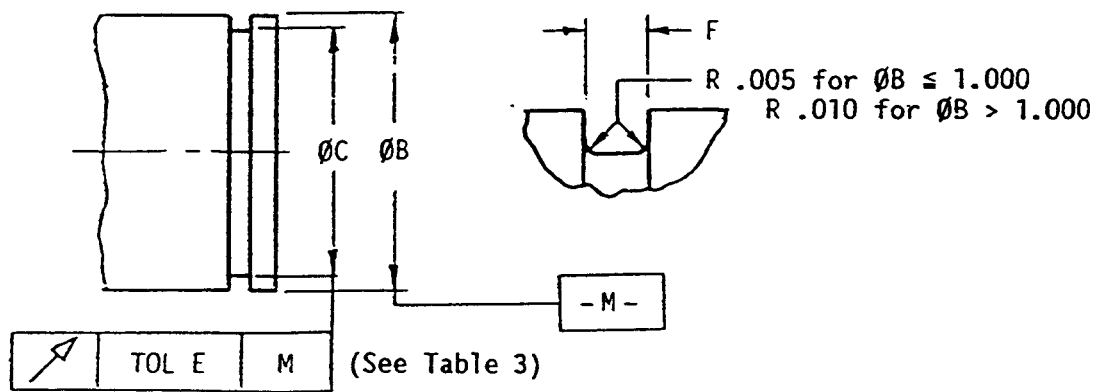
Groove dimensions, Type I, Classes 1 and 2 retaining rings
